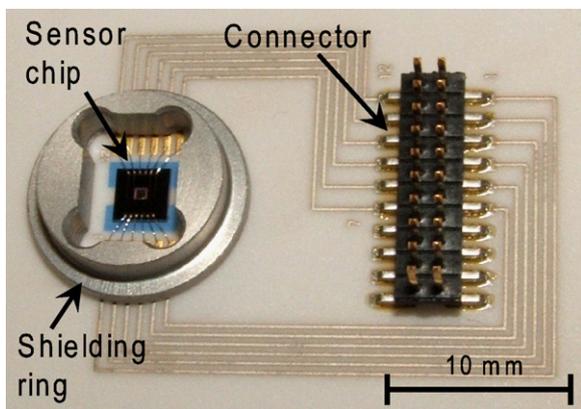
The sensor chip mounted inside the aluminum shielding ring on the alumina printed circuit board.
